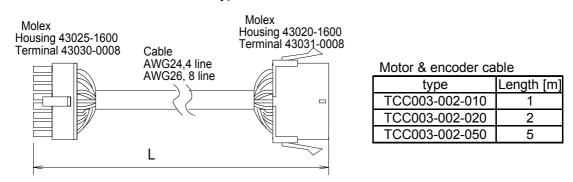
TCC003-002 : extension cable for motor + encoder line with standard type connector
